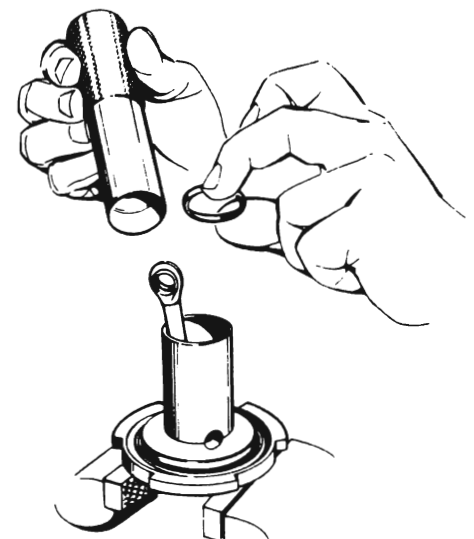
Installing Floating Control Valve Retainer With Installer J-23175
